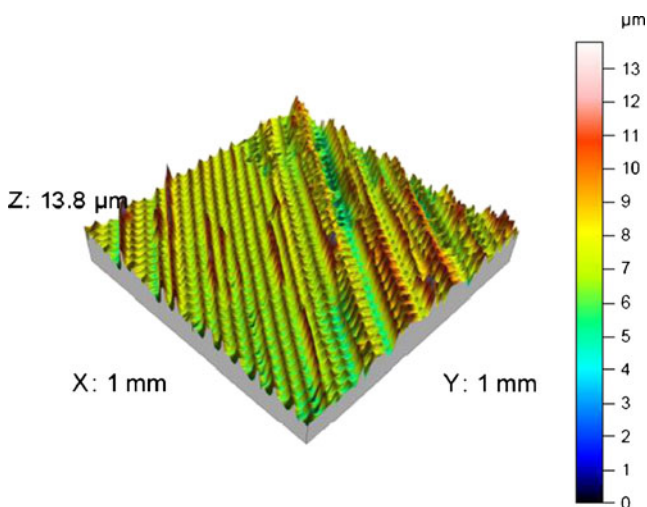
A scanning image of the dominating form of grinding grain wear when machining with 3CB grinding wheels
